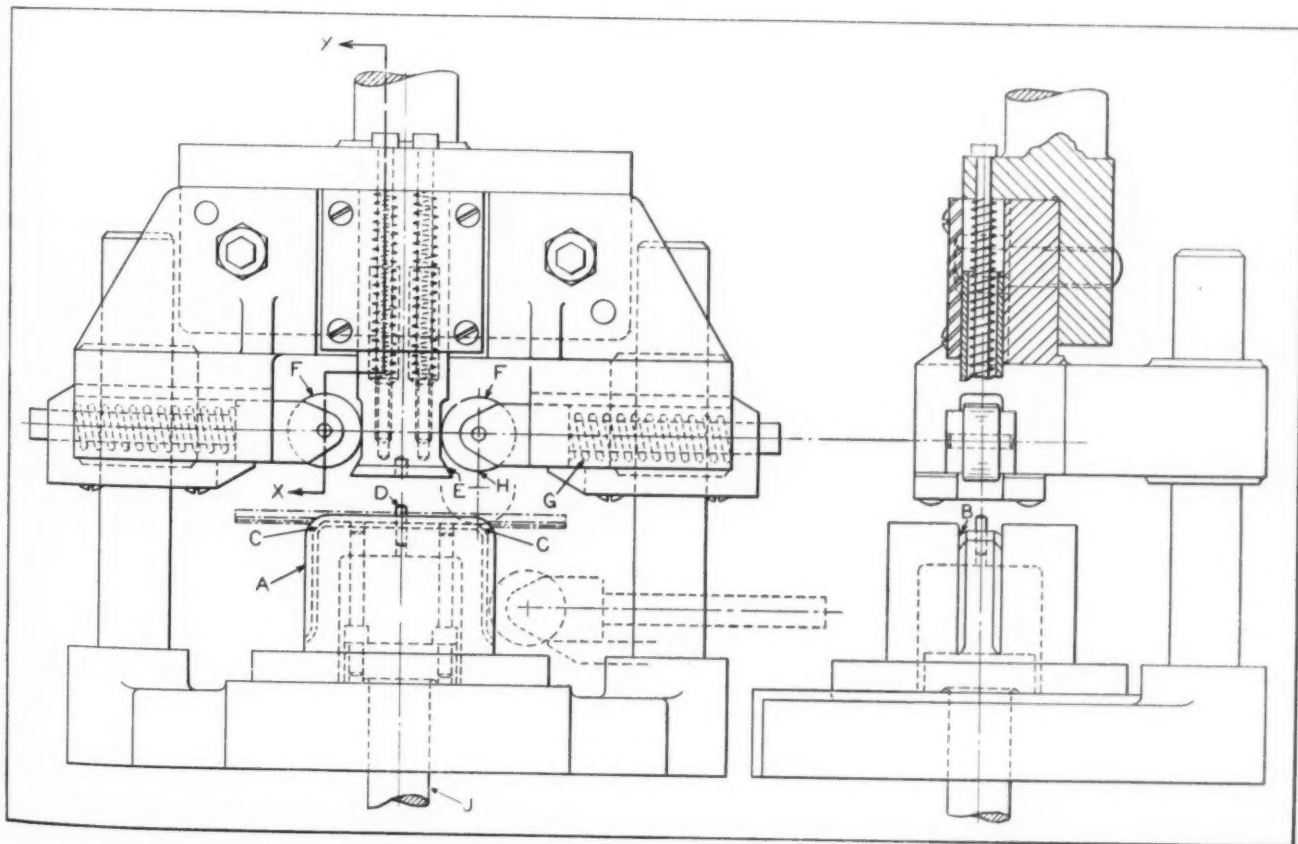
Die Employed for Forming the Bead and Flanges of Channel-shaped Part
